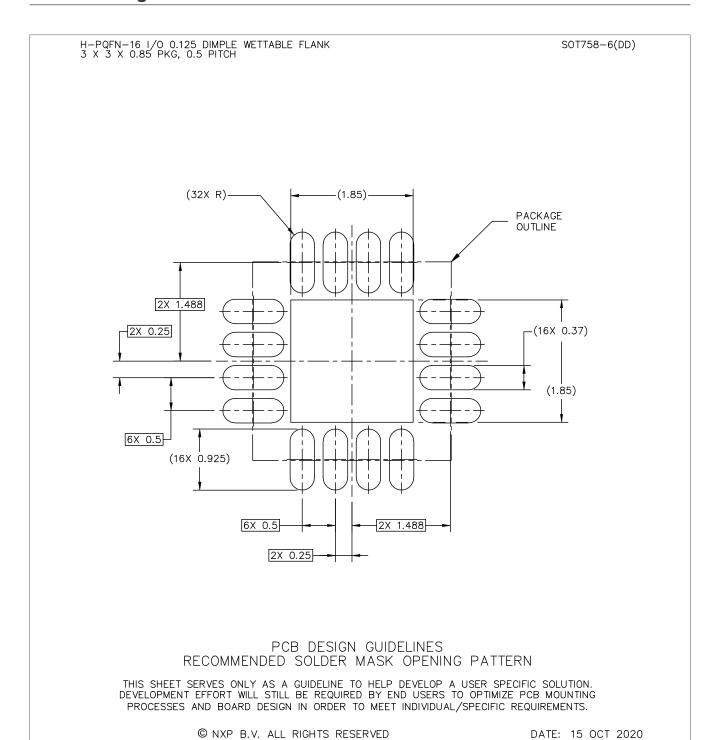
Reflow soldering footprint part1 for HVQFN16 (SOT758-6(DD))
